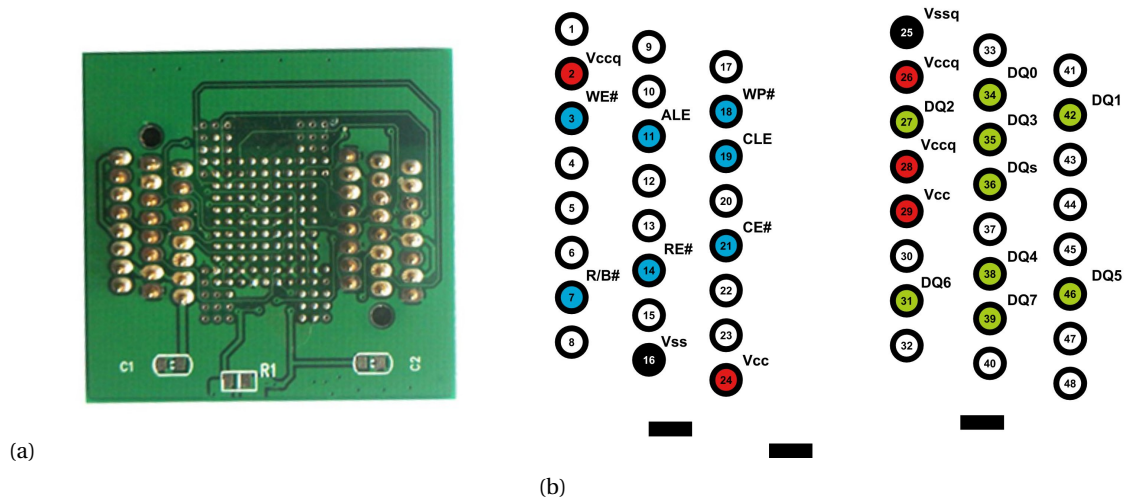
(a) Image of the bottom side of the socket with the PCB. (b) Mapped pins to the external leads of the socket board. The black rectangulars on the bottom represent placeholders for SMD as seen on the socket PCB in (a).
